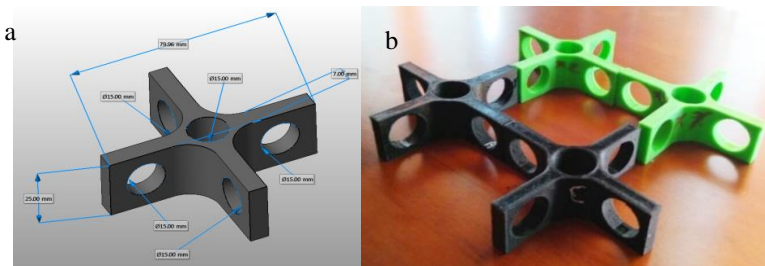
(a) Grinder blade for process parameter optimization; (b) FDM printed model
